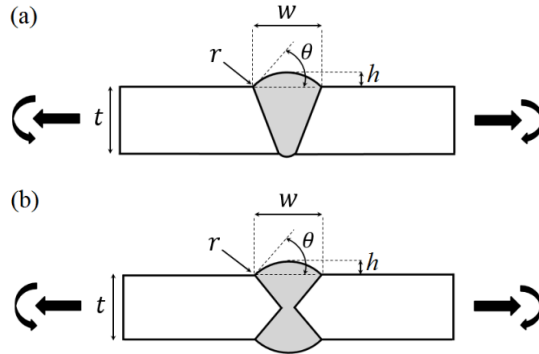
The configuration of a (a) single-V butt weld and (b) double-V butt weld
